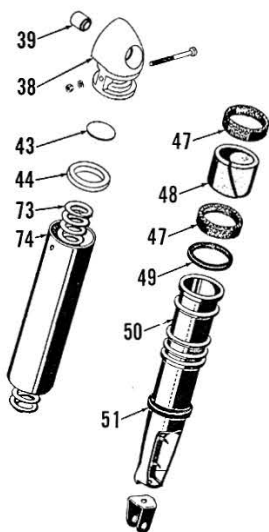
Exploded view of suspension unit typical of type used on rear of Mo-Ped and Campus 50 and both front and rear of 60cc Motor Scooter.
